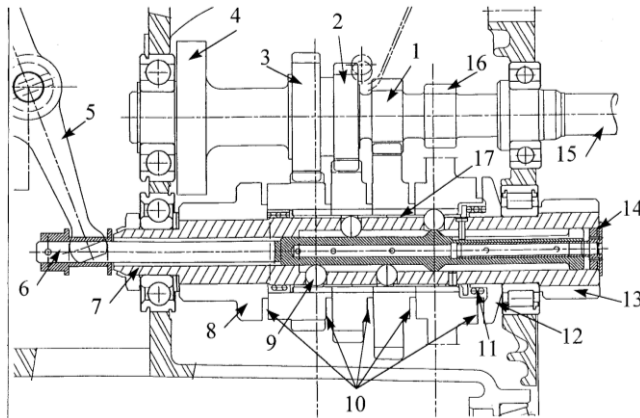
Prototype of a ball shift mechanism for a 3+R-speed automotive gearbox [27]
